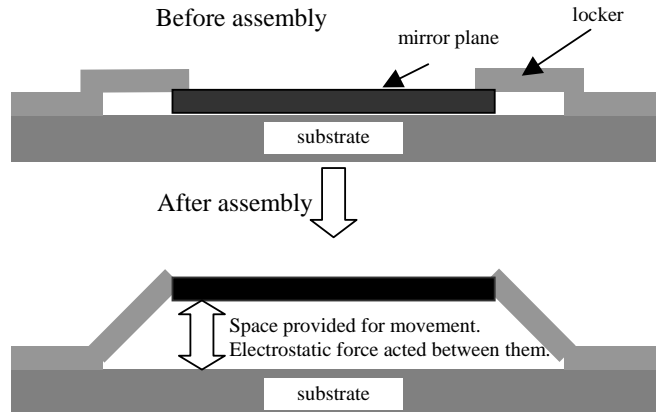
Conceptual drawing of the side view of a 2D micro mirror before and after assembly.
